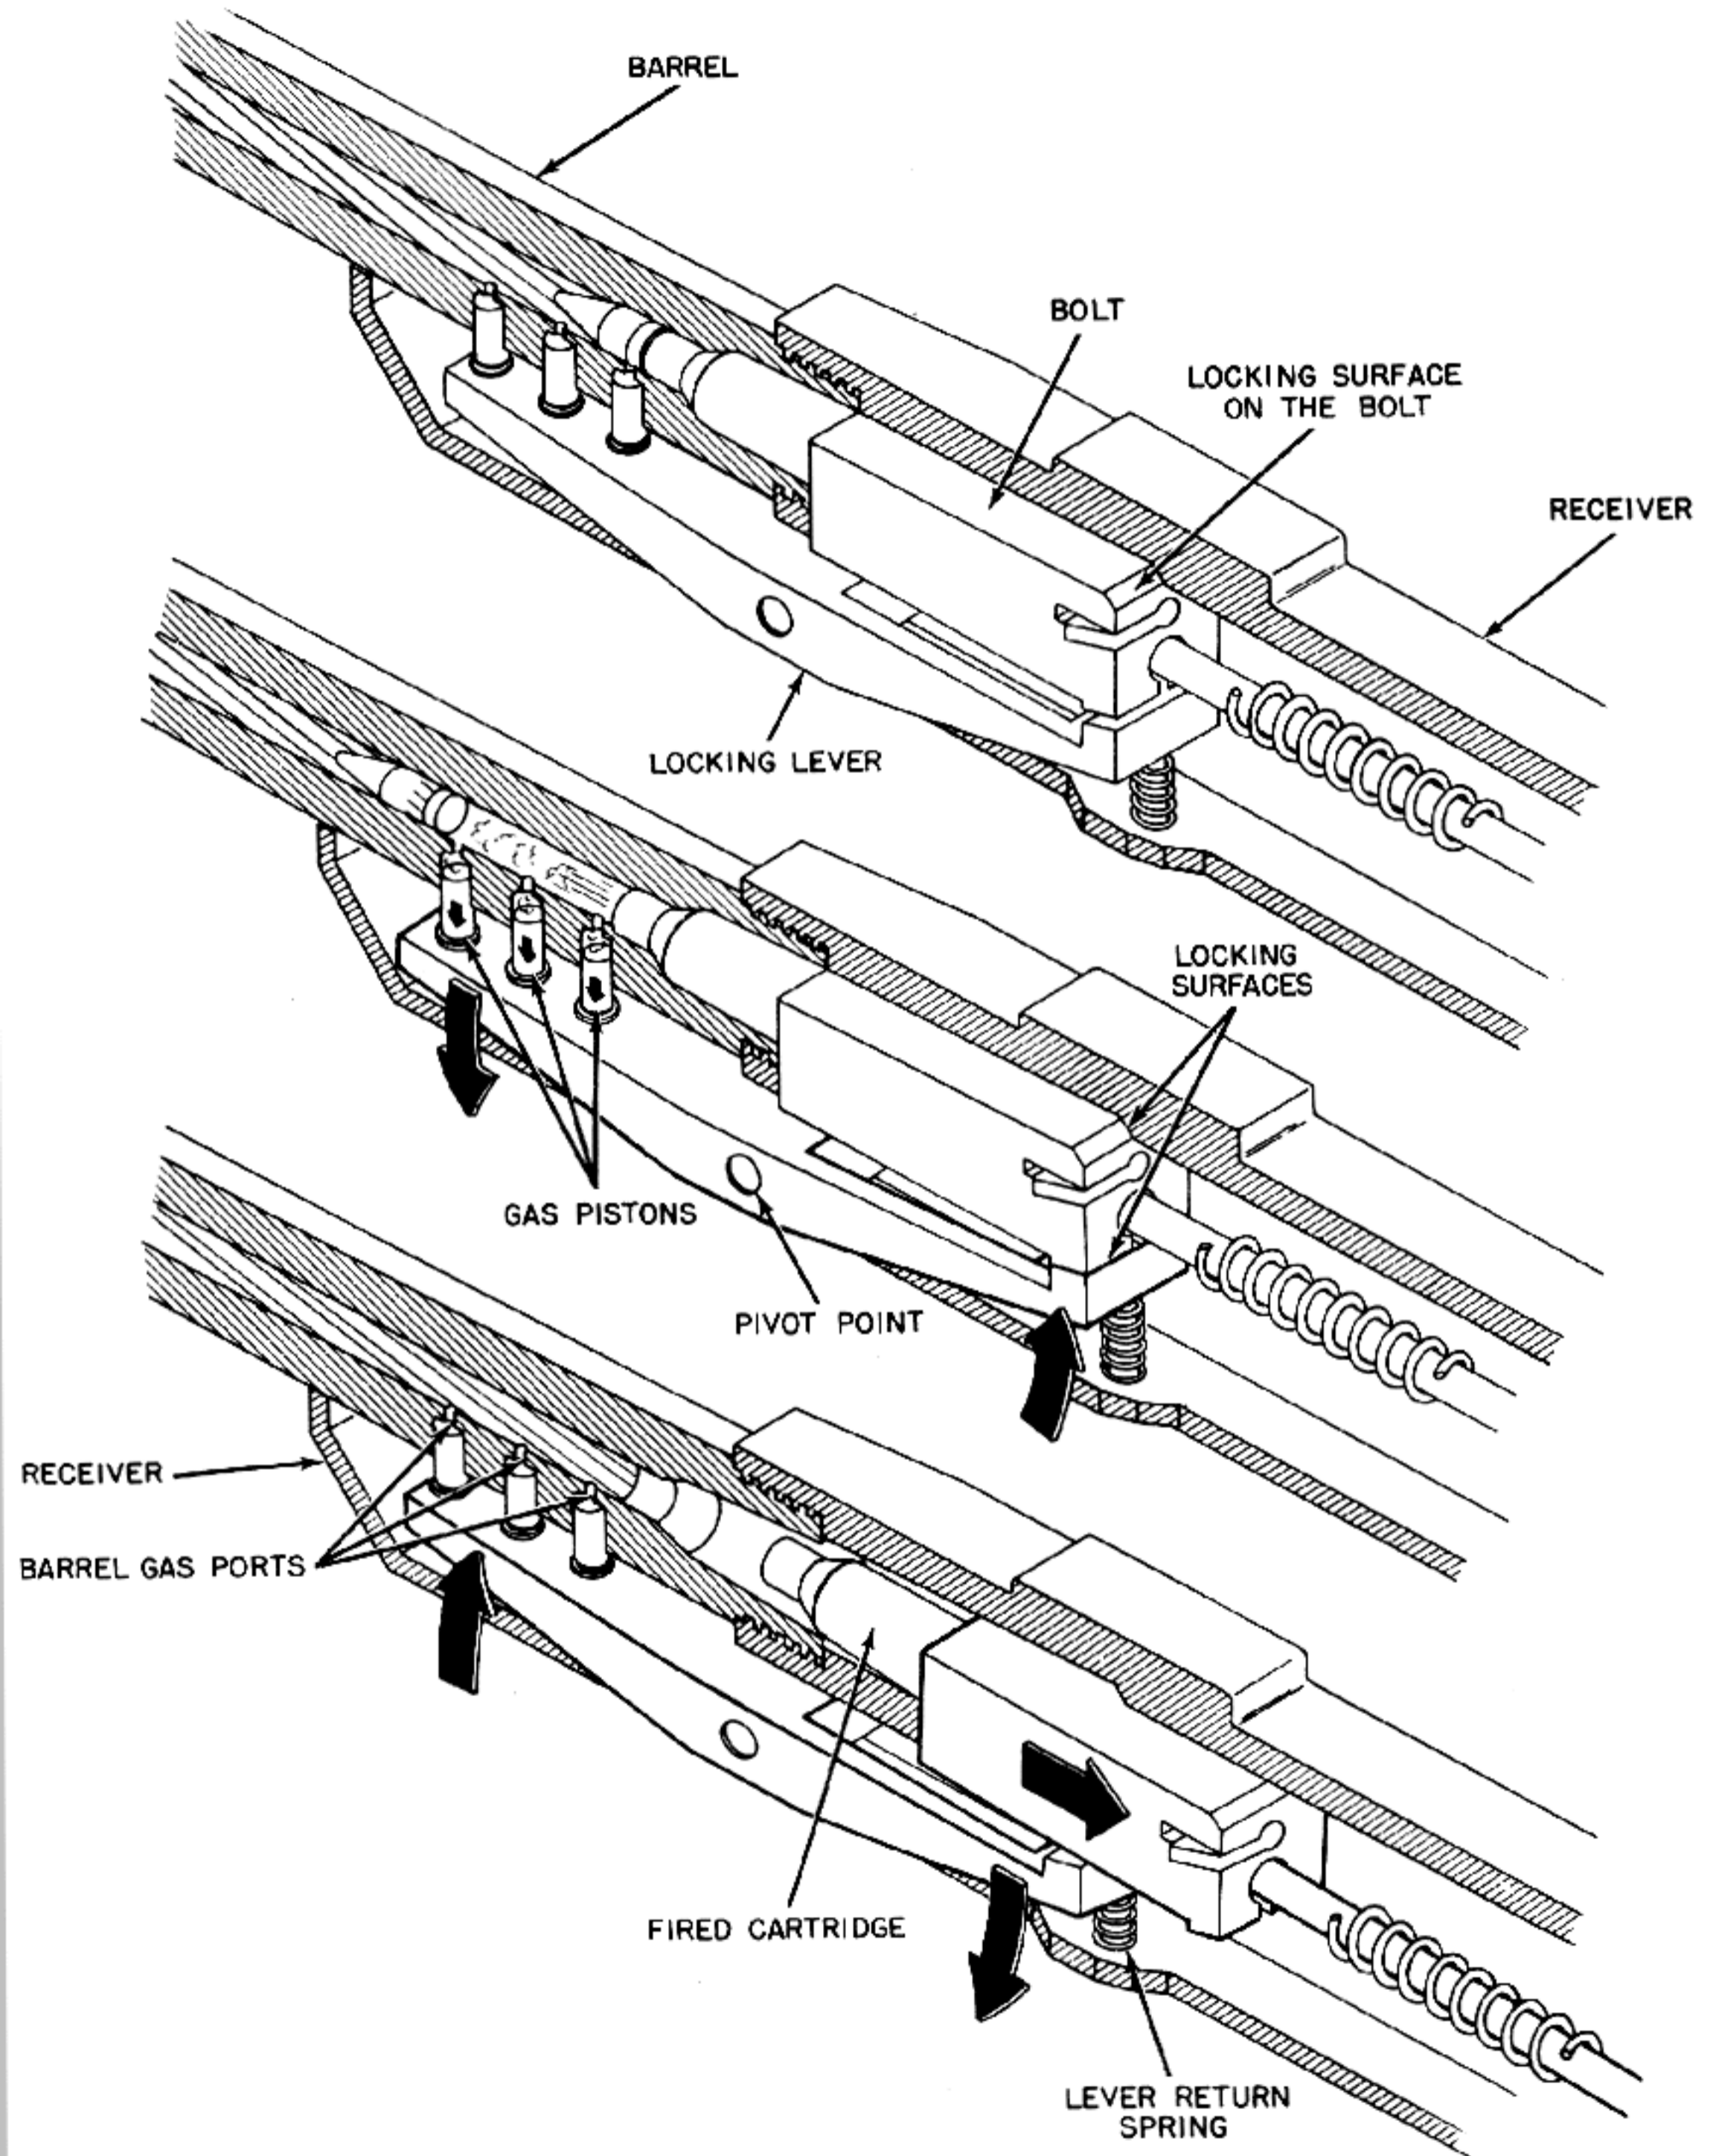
Gas Pressure Acting on Lever Locks Bolt.
